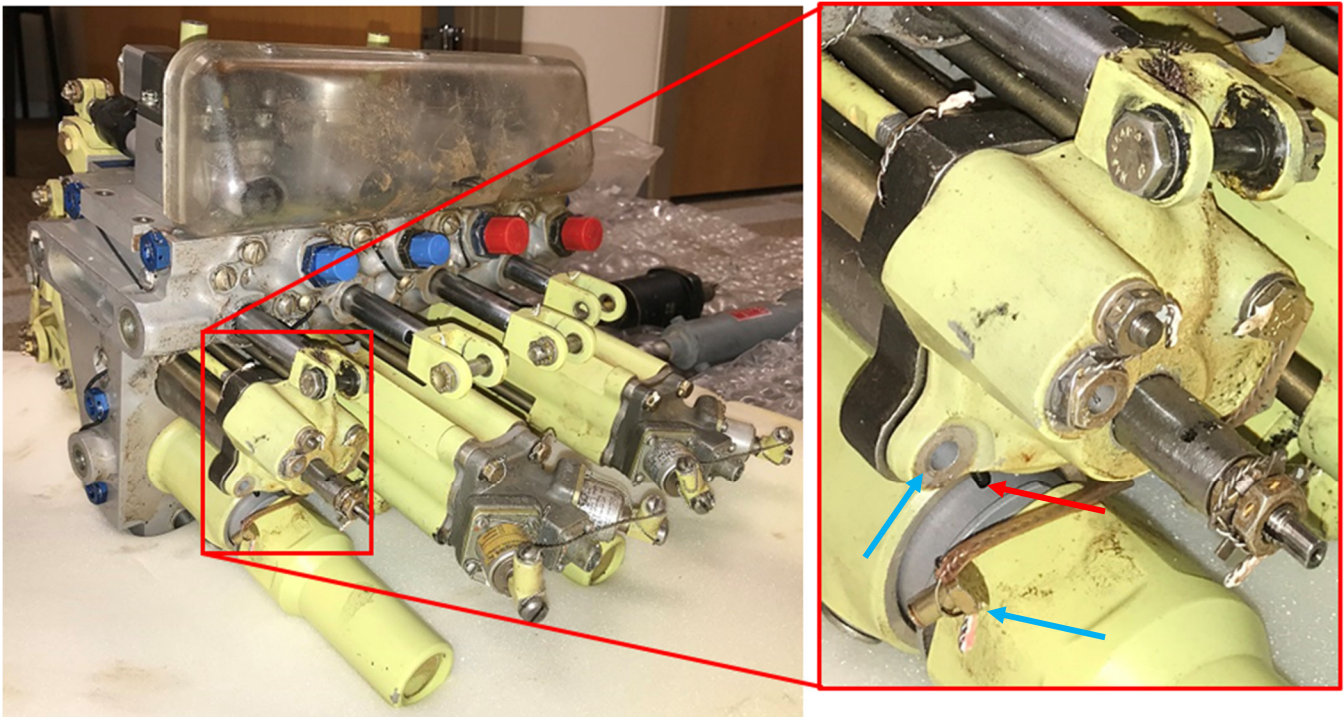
The auxiliary servocylinder as received. The blue arrows point to the fractured forward-right AN3H5A bolt and its bolt hole. The red arrow points to the extruded O-ring.
